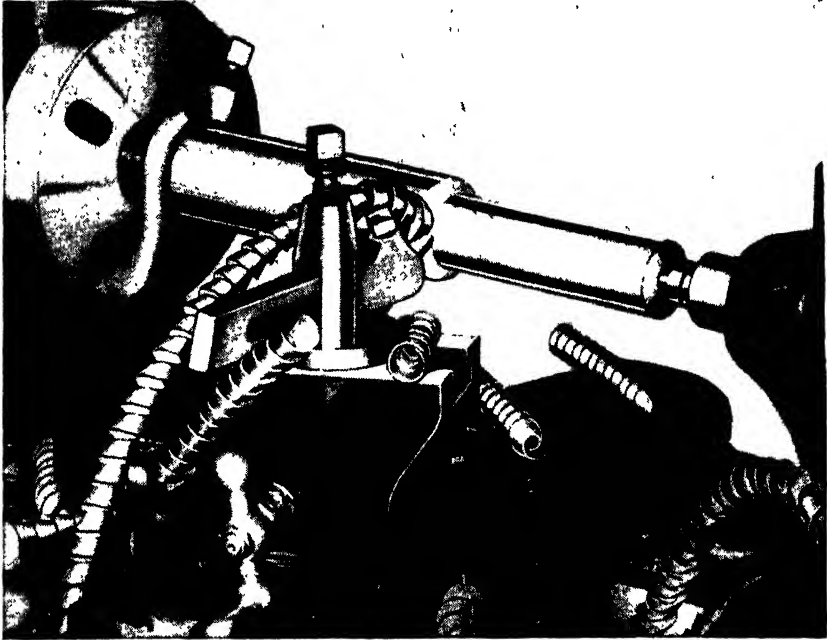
Turning a steel shaft mounted between centers. (South Bend Lathe Works)
